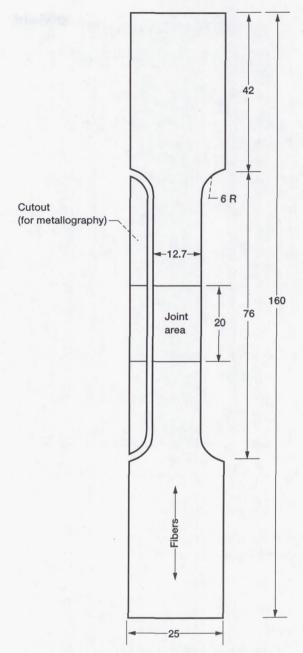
Typical tensile test specimen for testing simulated and welded joints in three- and four-ply W-Cu composite sheet. (Dimensions are in mm.)
